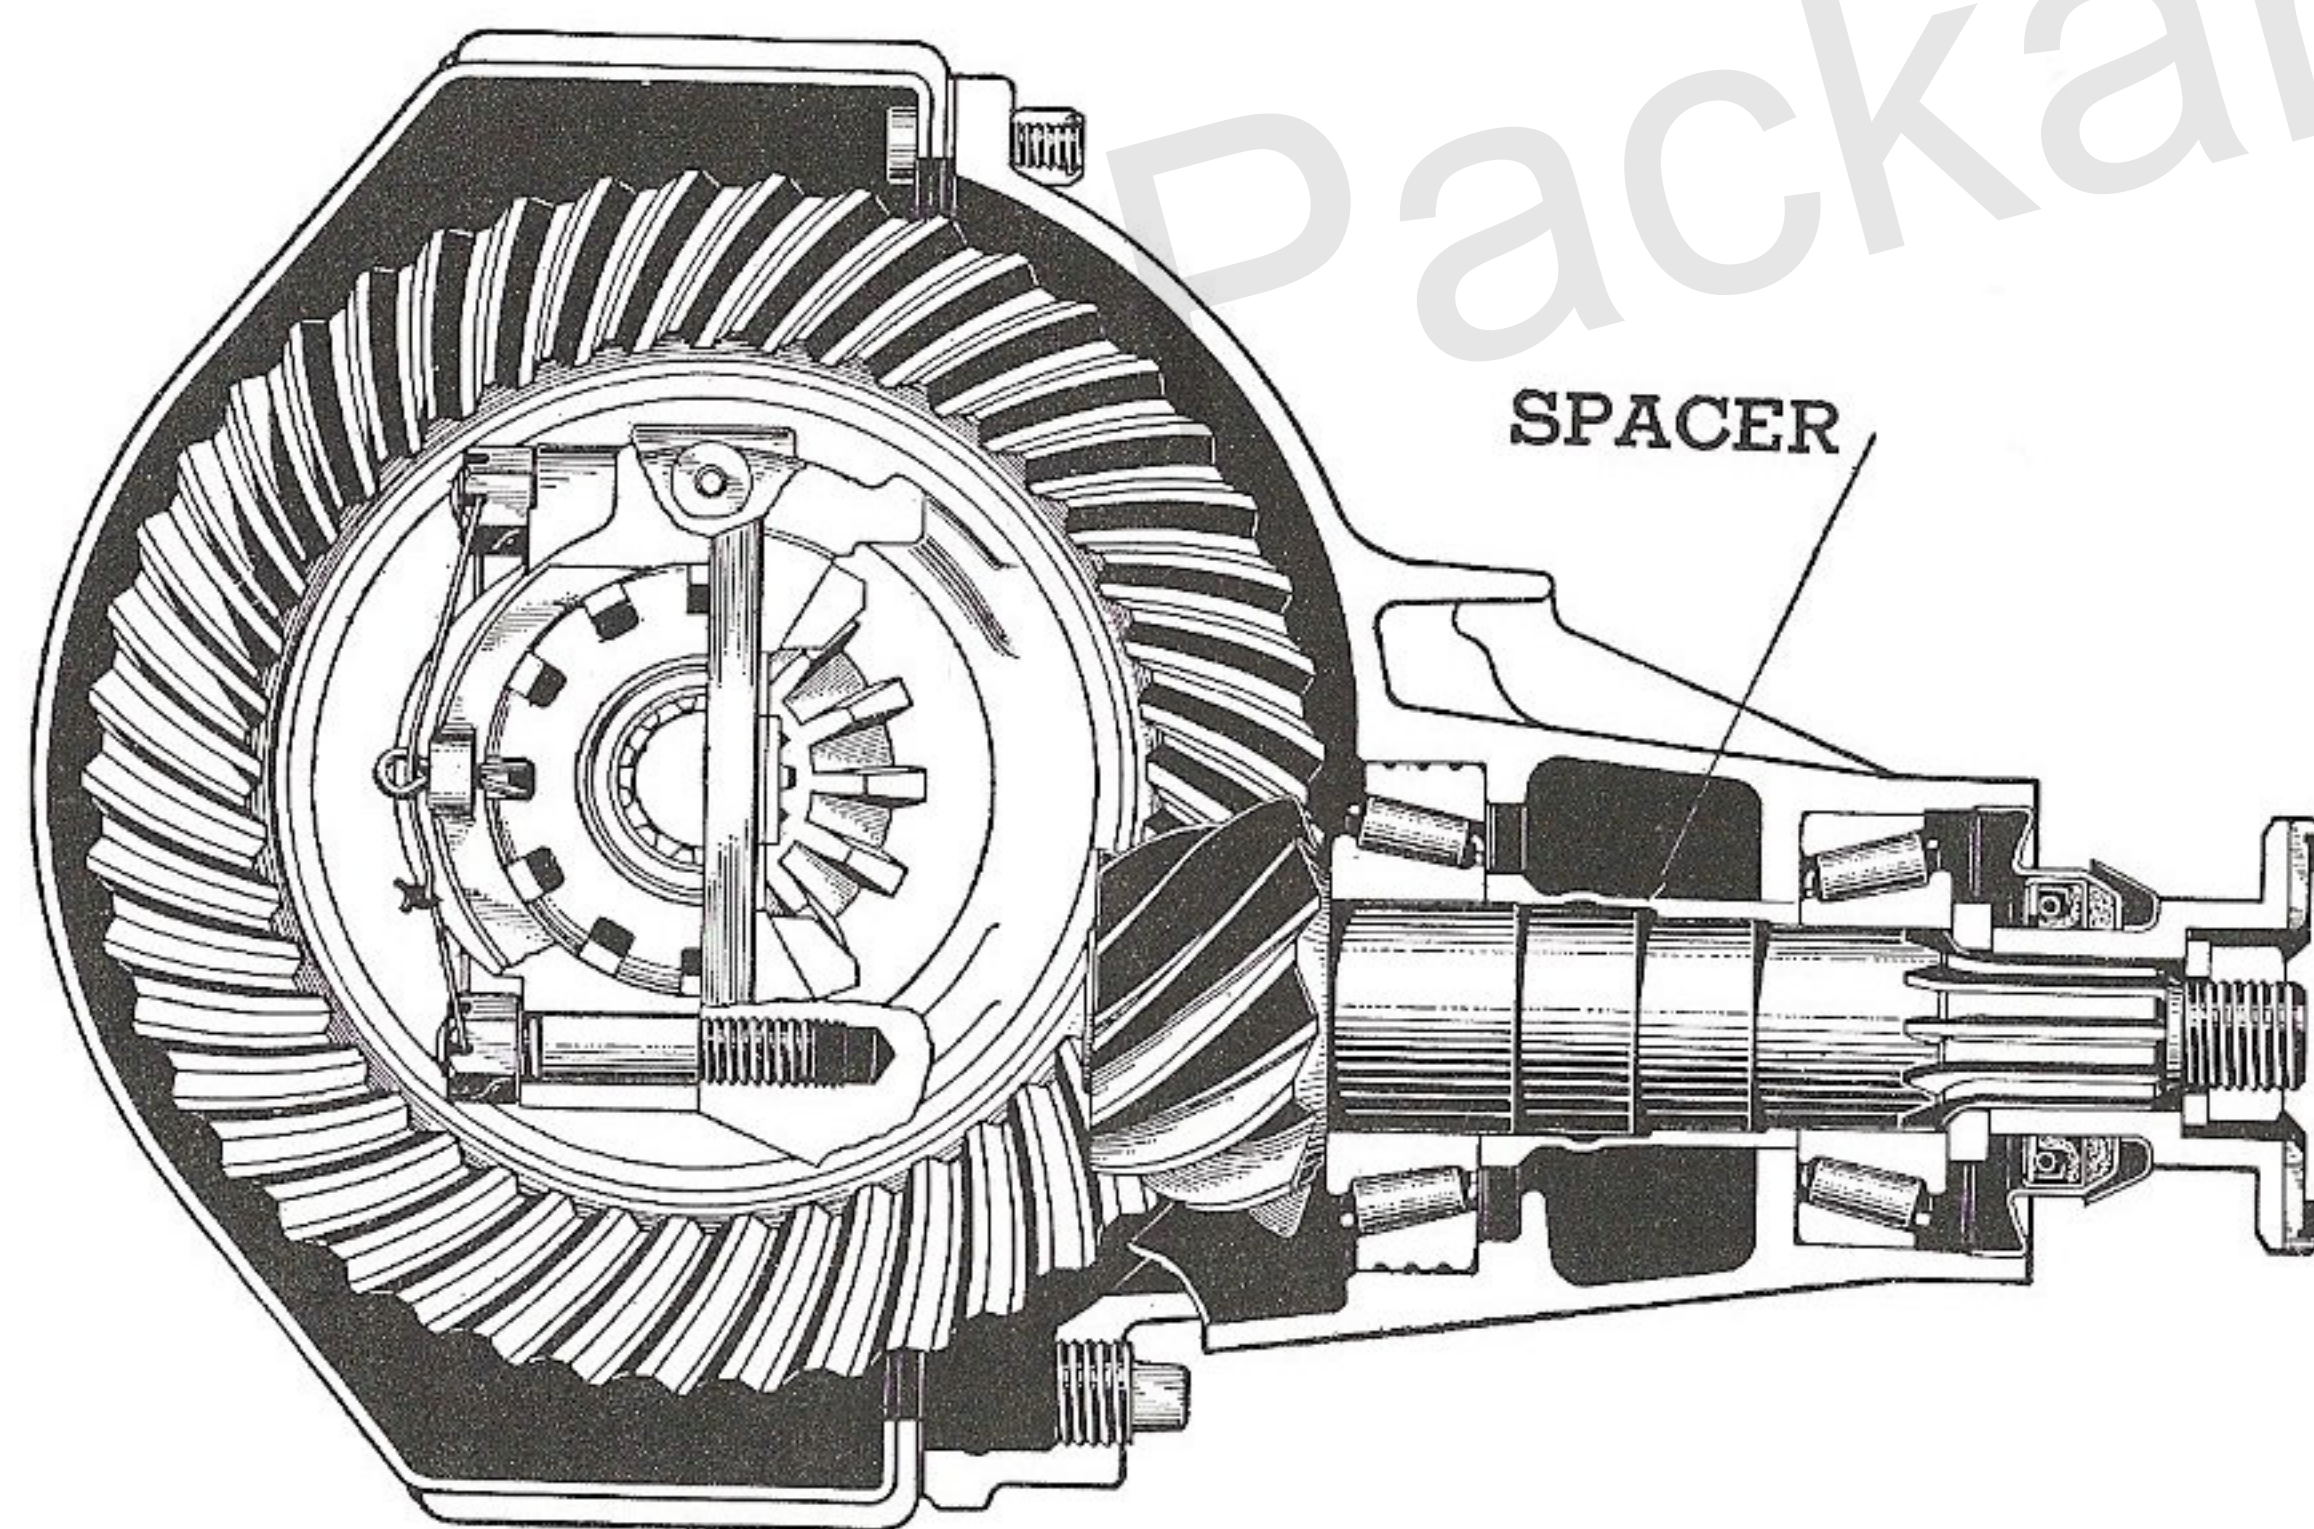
Rear Axle Differential Carrier Assembly. Note Crimp Near Rear End of Pinion Spacer
